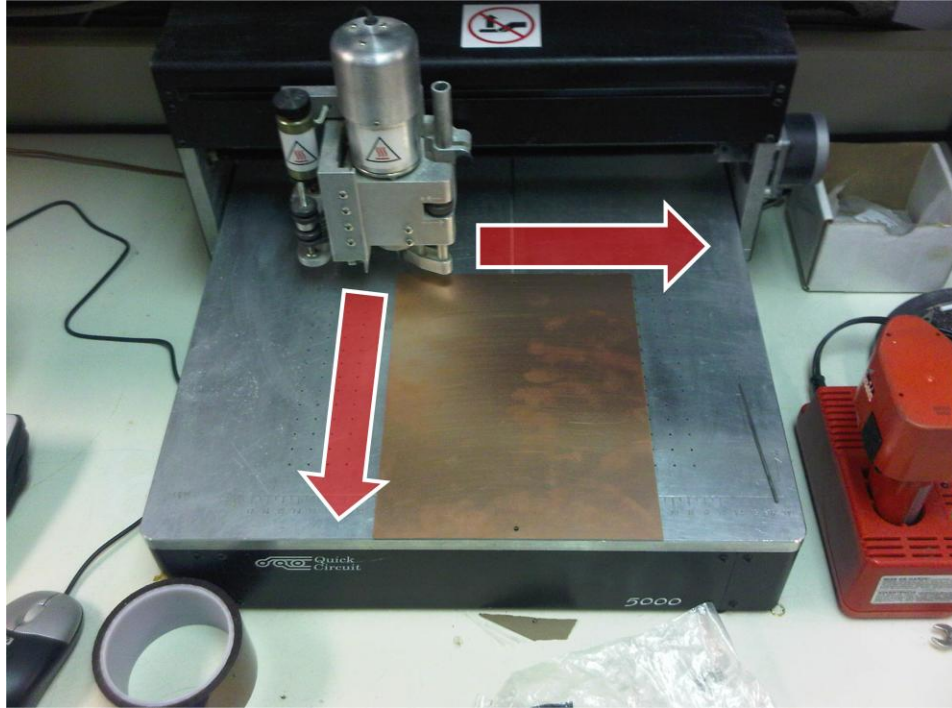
AFIT milling machine with copper-clad board for PCB construction
